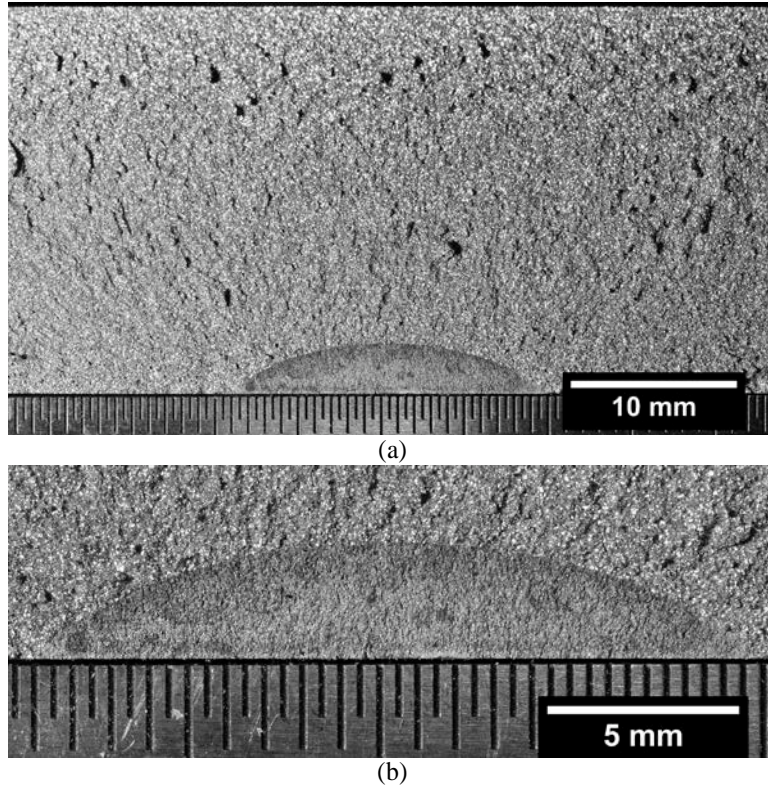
Optical fractographs of exposed fatigue crack from the NDE SD 4-003 specimen, showing (a) the full specimen thickness and (b) a closeup of the fatigue crack region.
